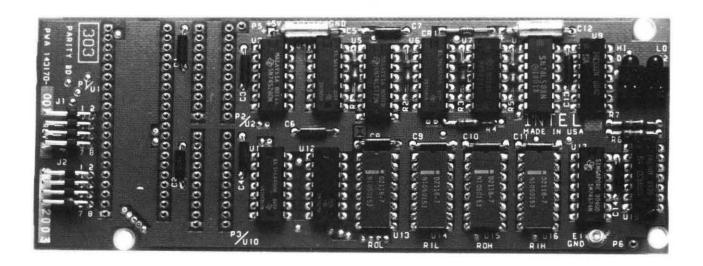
iSBC™ 303 Parity Generator/Checker Multimodule Board
